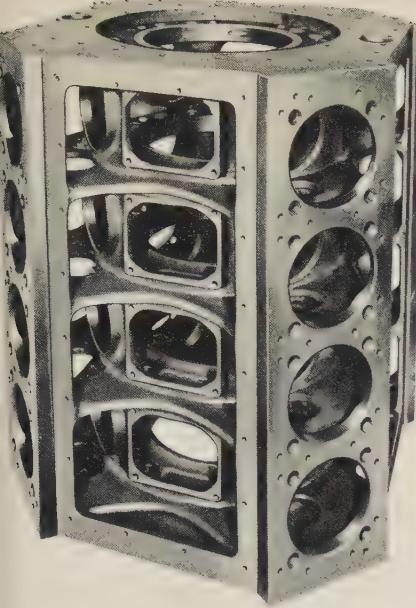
The completely welded and machined crankcase assembly consists of 56 individual steel forgings and 11 flame-cut steel plates.
